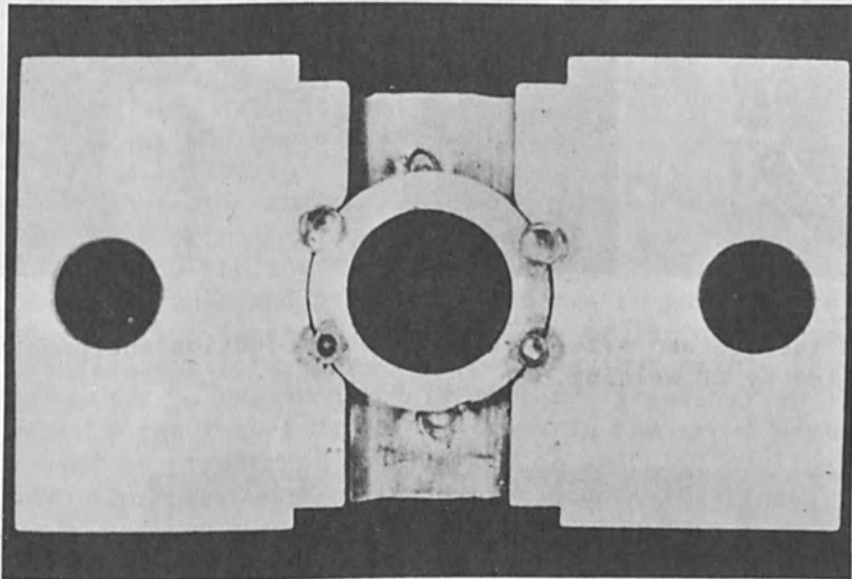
Guide block for polymer mold has bushing permanently located by EB welder.
